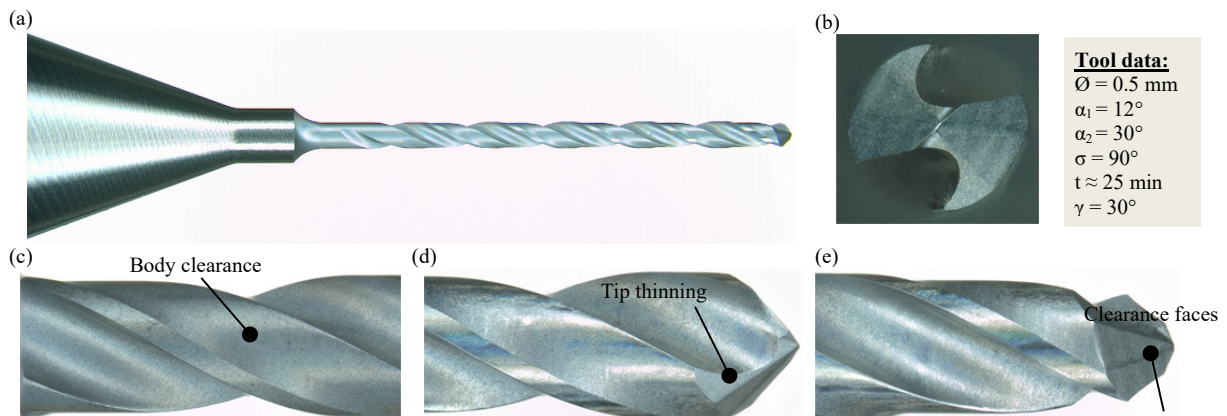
Optical microscope images of a $\text{\O}0.5\text{mm}$ WC composite drill bit: (a) Overview of the drill bit; (b) top view; (c) side view with close-up of the body clearance; (d) side view with close-up of the tip thinning; (e) side view with close-up of the clearance faces.
